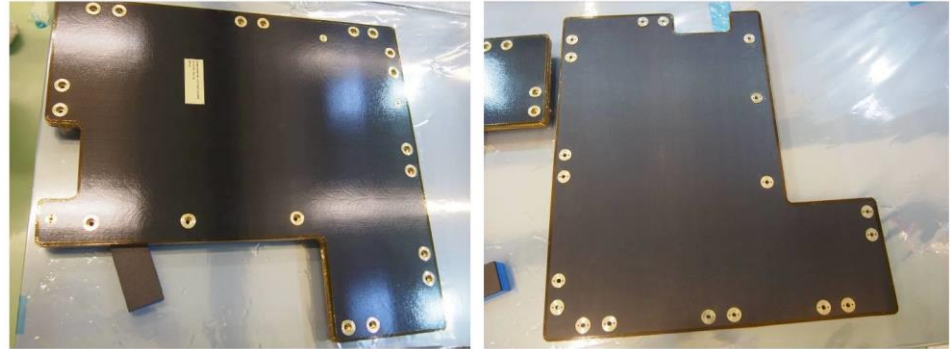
Demonstrators final visual inspection and cleaning.
